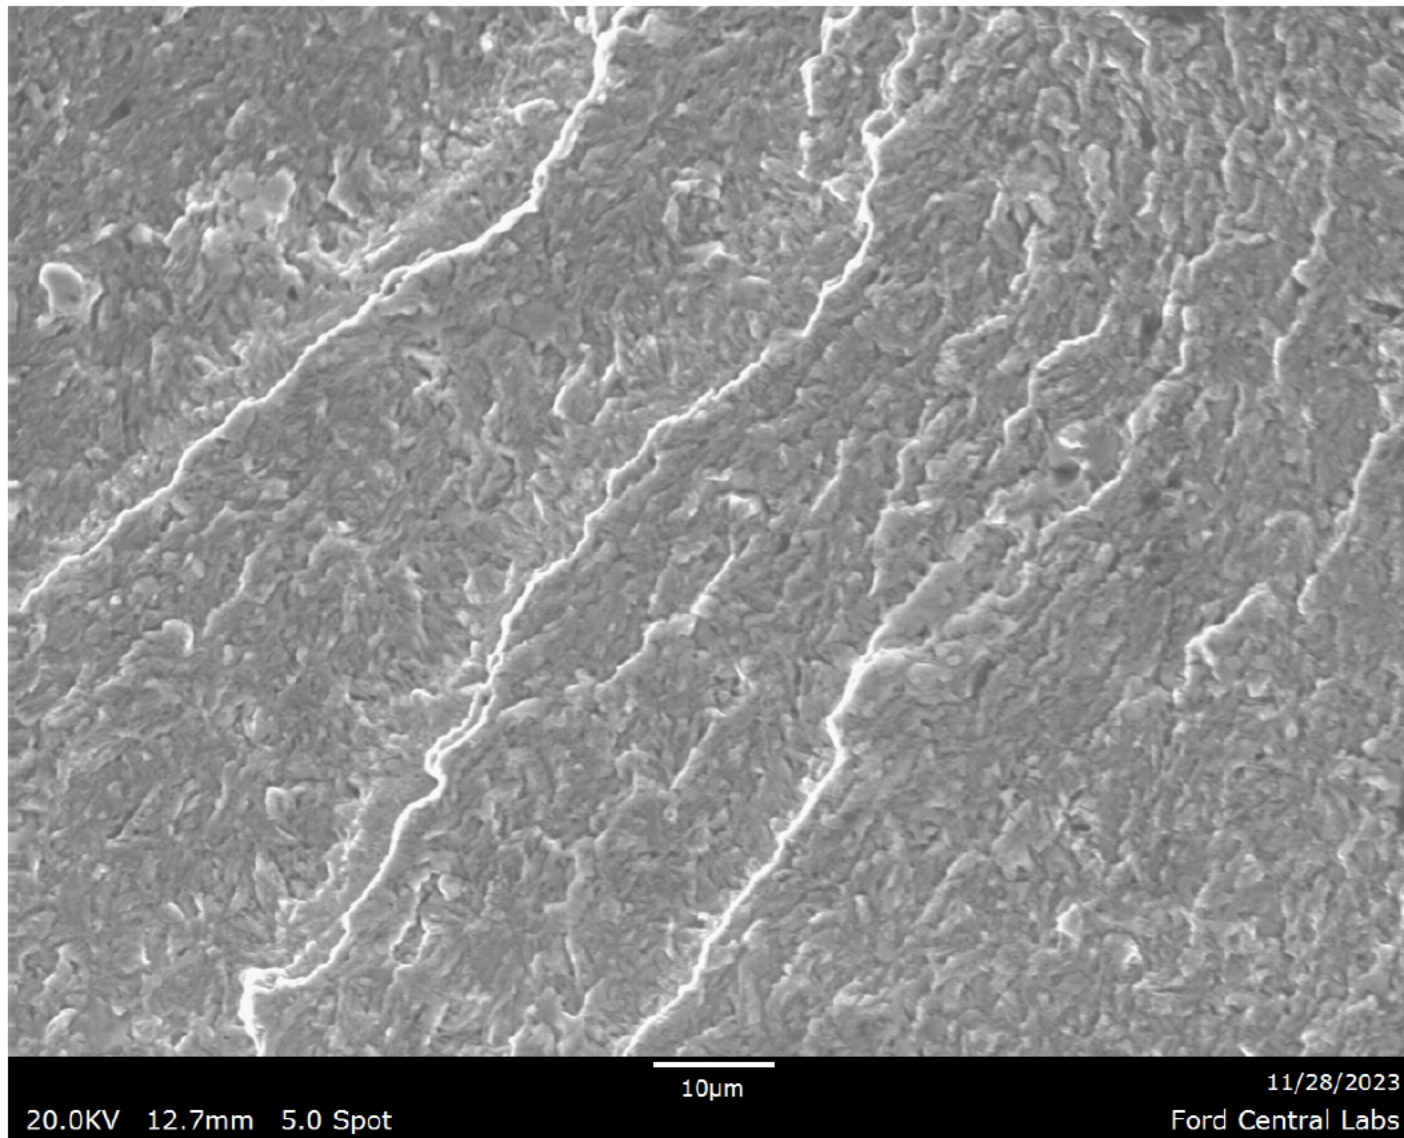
Intake Valve – 10 – Magnified SEM view of Figure 5 showing Micro-void coalescence (ductile dimples) in the final fracture region.
